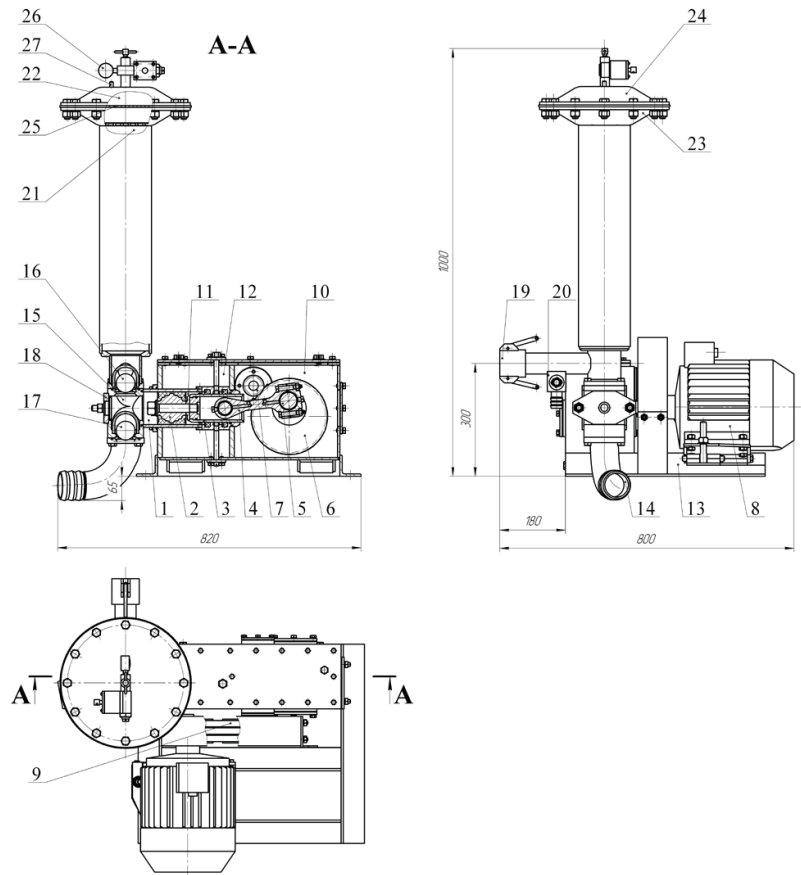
One-piston pump with a combined pressure compensator type RN-3.8: 1 – slave cylinder; 2 – piston; 3 – slide; 4 – rod; 5 – crankshaft axis; 6 – gear; 7 – gear shaft; 8 – motor; 9 – belt drive; 10, 12 – locked chamber; 11 – rod cavity; 13 – frame; 14 – suction nozzle; 15 – working chamber; 16, 17 – ball valves; 18 – cover; 19 – discharge pipe; 20 – pressure reducing valve; 21, 22 – closed compensator chamber; 23, 24 – disc-shaped parts; 25 – rubber diaphragm; 26 – pressure gauge; 27 – nipple
